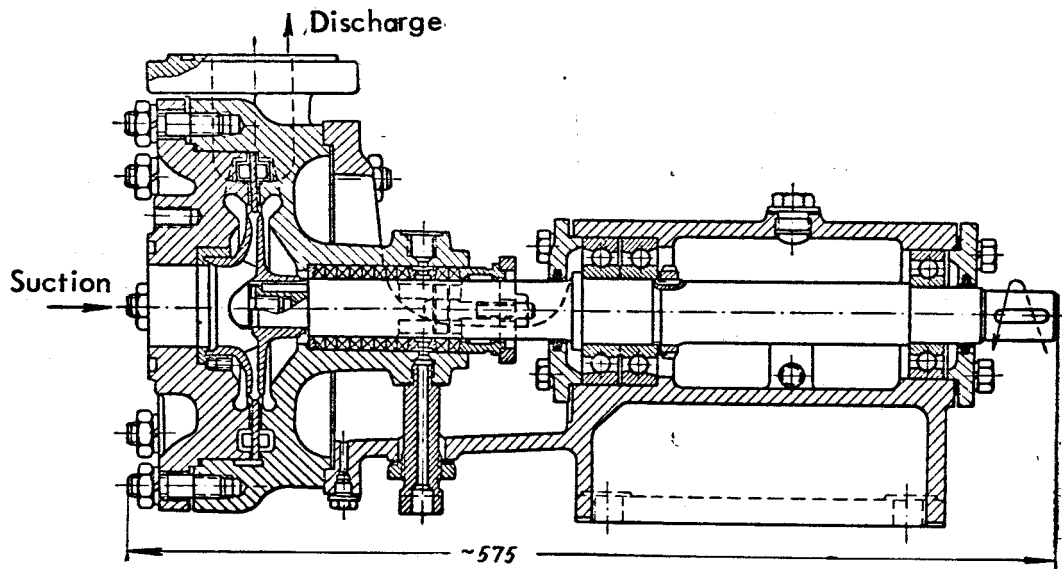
2STsV-0.8 High-Head Pump with a Single Centrifugal-Vortex Impeller.
